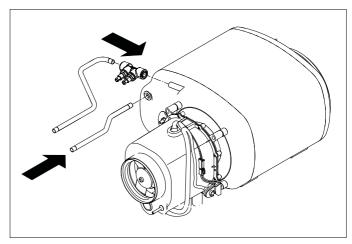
Install ventilation/overpressure valve and hot and cold-water line connection.
